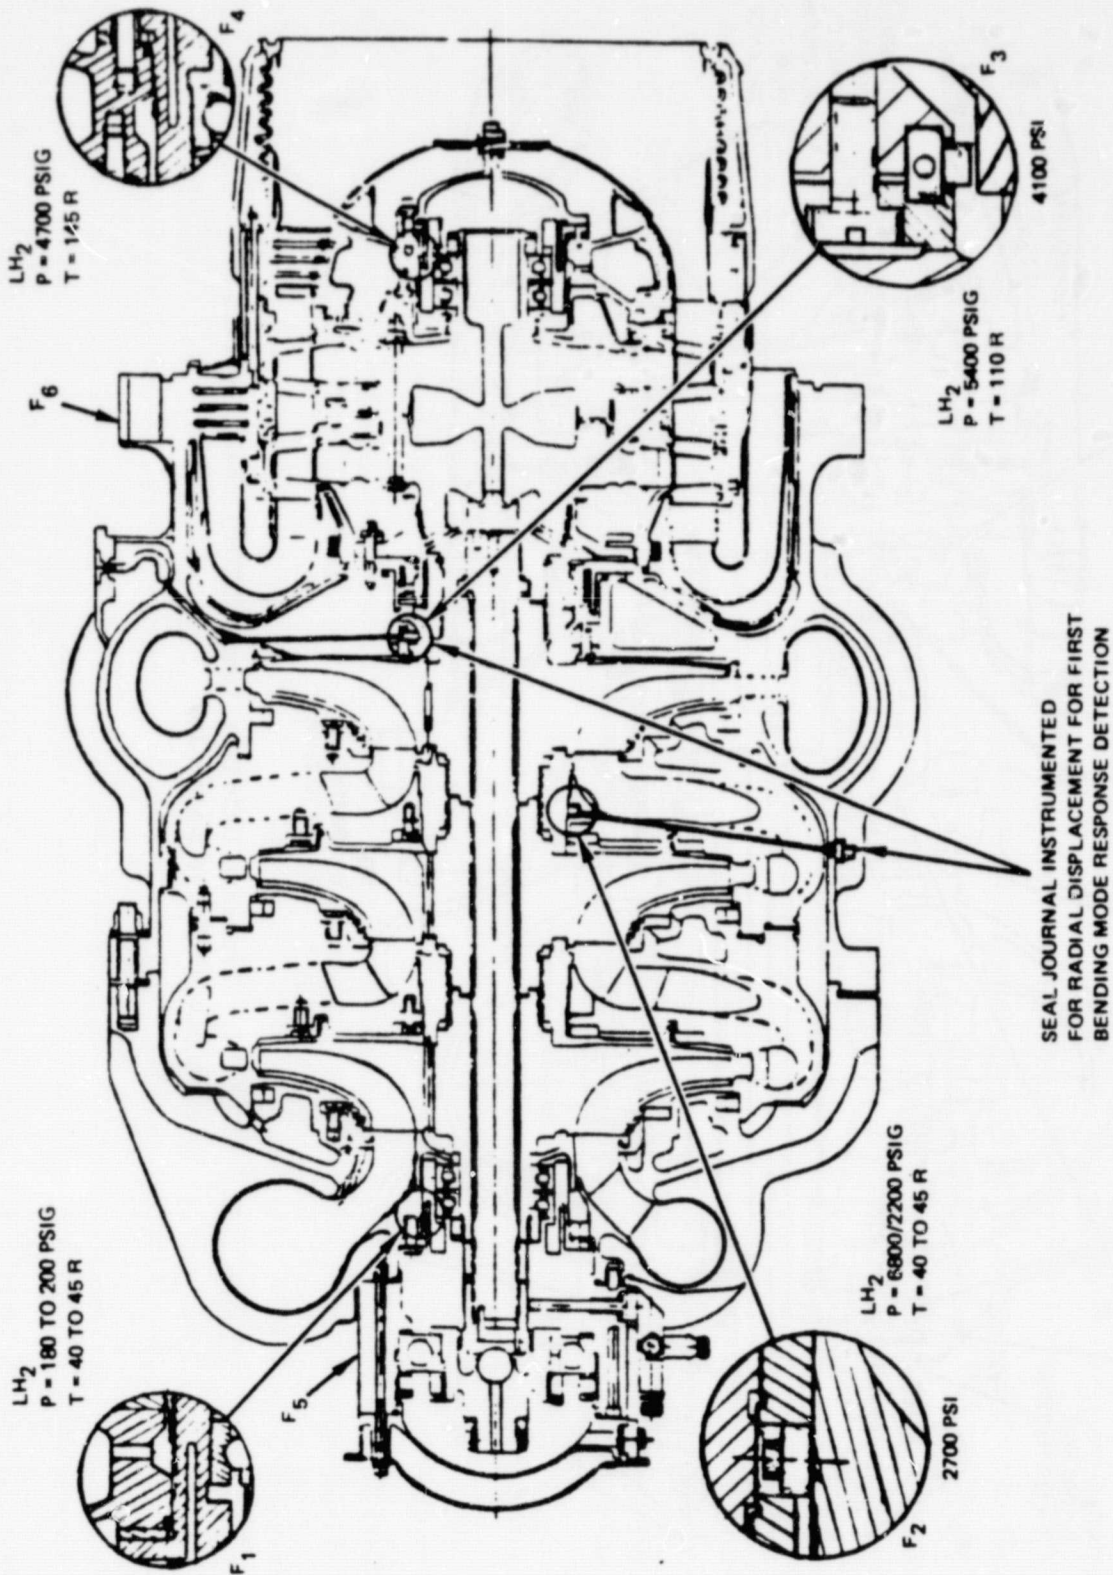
SSME HPFTP Instrumentation for Improved Rotor Balancing
